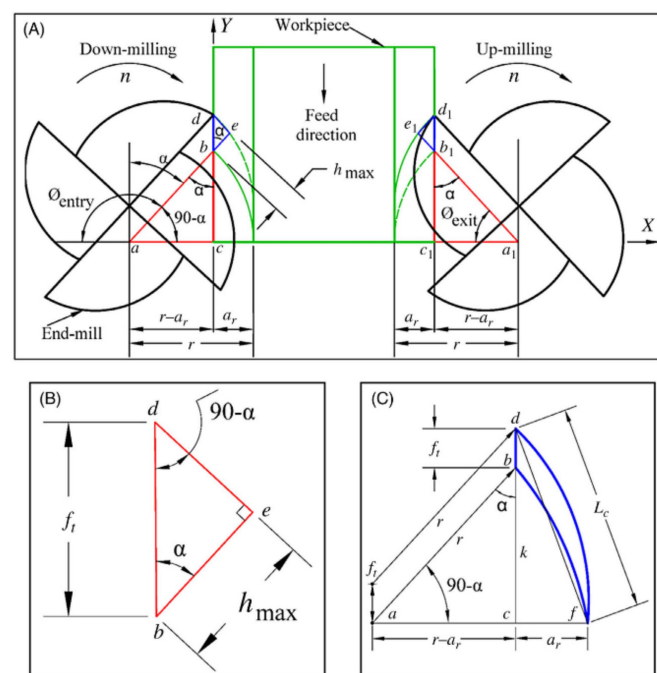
Chip formation showing (A) chip formation showing cutter tooth entry angle in down-milling and cutter tooth exit angle in up-milling, (B) maximum chip thickness, h_{max} , and (C) chip length, L_c [76].
